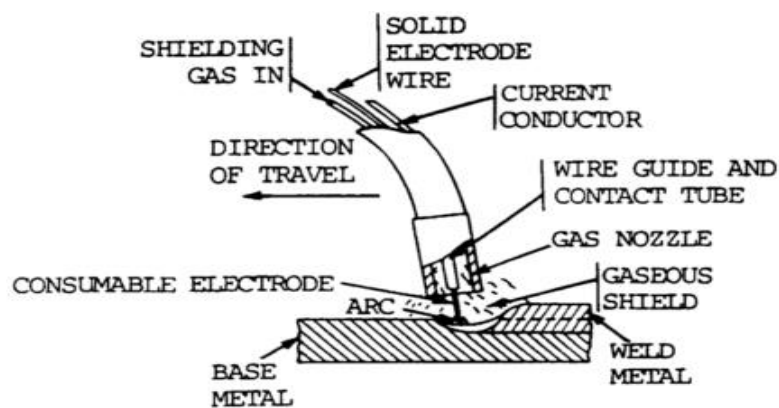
A schematic diagram of a typical Gas Metal Arc Weld (MWC, 2016)
